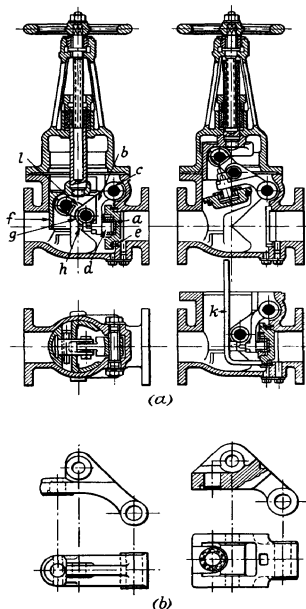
(a) "IDEAL" VALVE FOR SUPERHEATED STEAM
